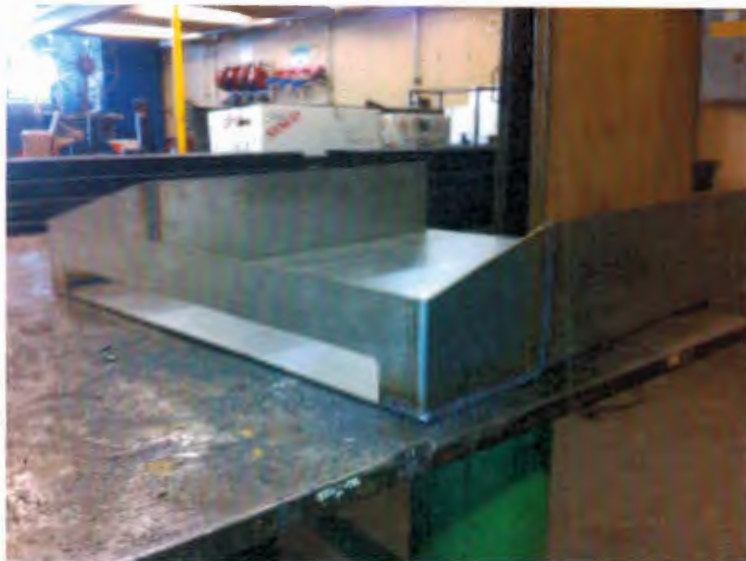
The Finished Hopper After Being TIG Welded
